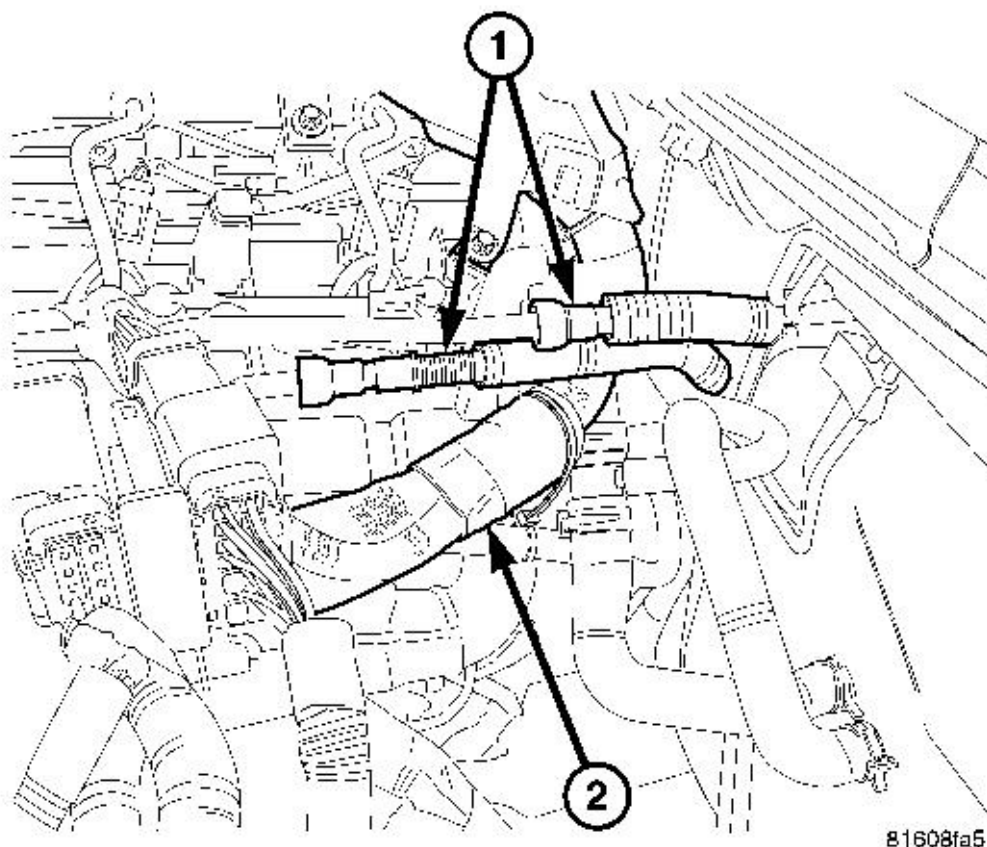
Fuel Tank Supply & Rear Engine Wiring Harness
